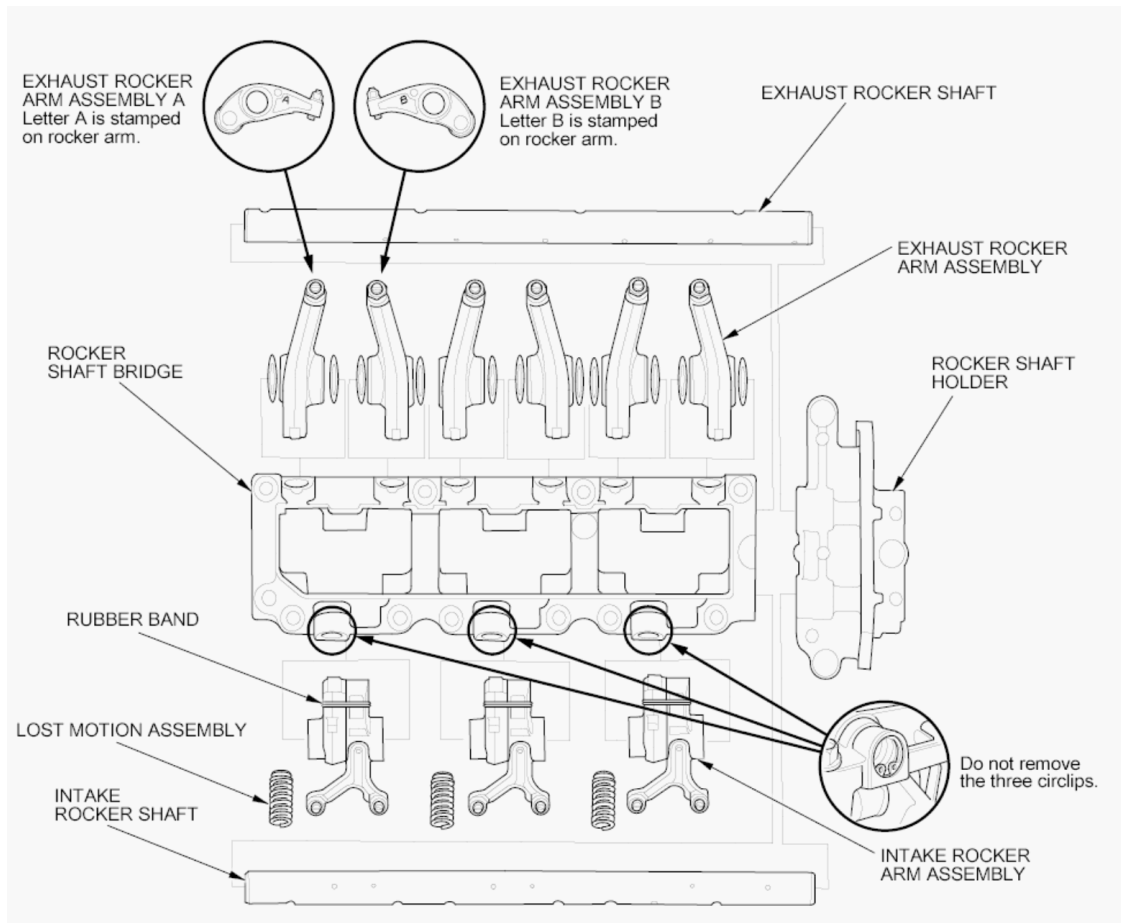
Identifying Rocker Arm And Shaft Assembly Components - Rear
